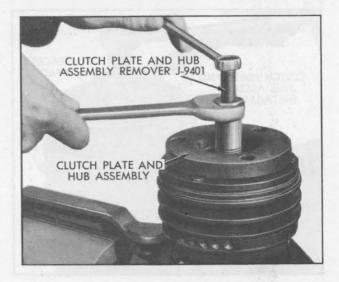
Removing Clutch Plate and Hub Assembly
